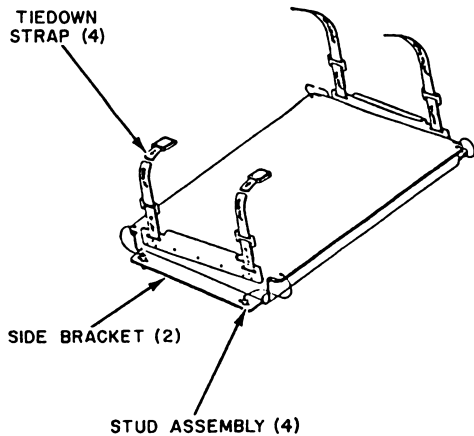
MXU-661/E skid platform adapter assembly.
